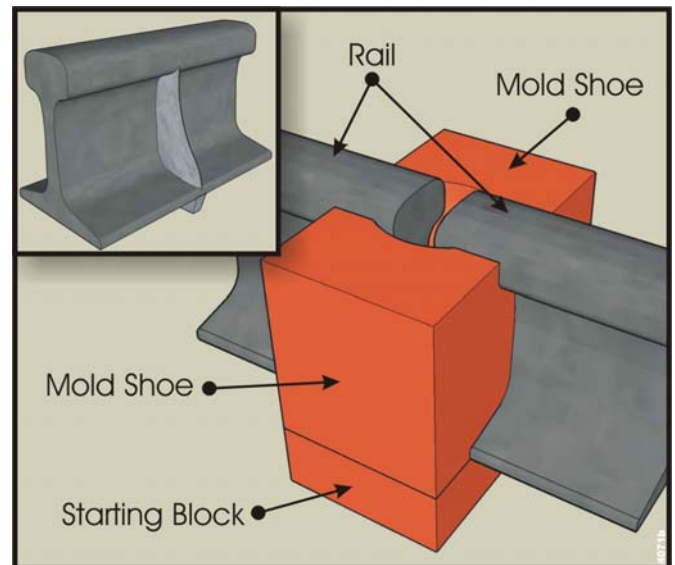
Electroslag Weld Cross-Section Diagram
